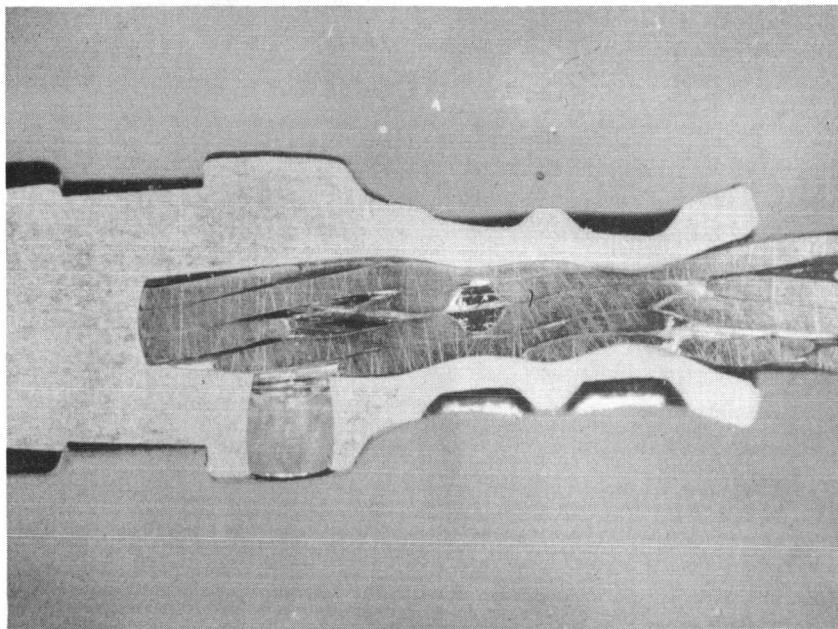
CESO-16-DO46-16 Crimped Contact Sectioned View
